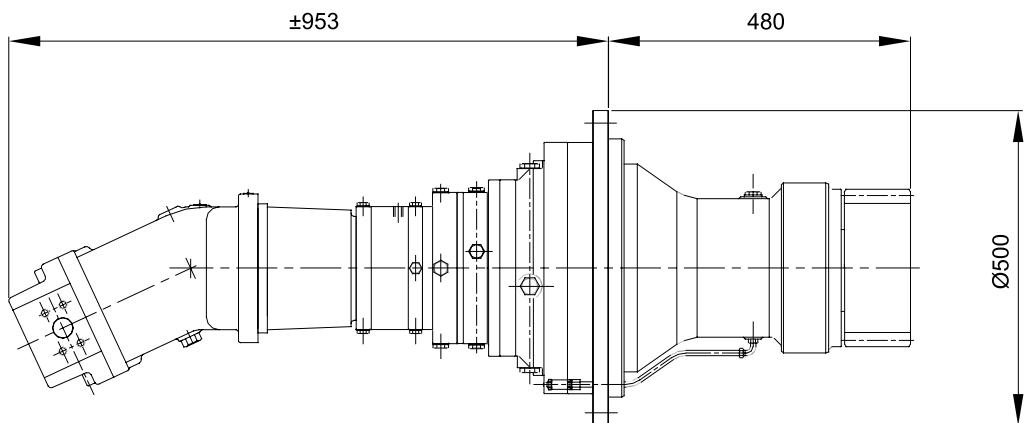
B Another compact design of a hydraulic motor with a disc brake and gearbox with a pinion as output shaft. This construction is often used for slewing drives of cranes. (Courtesy of Brevini)
